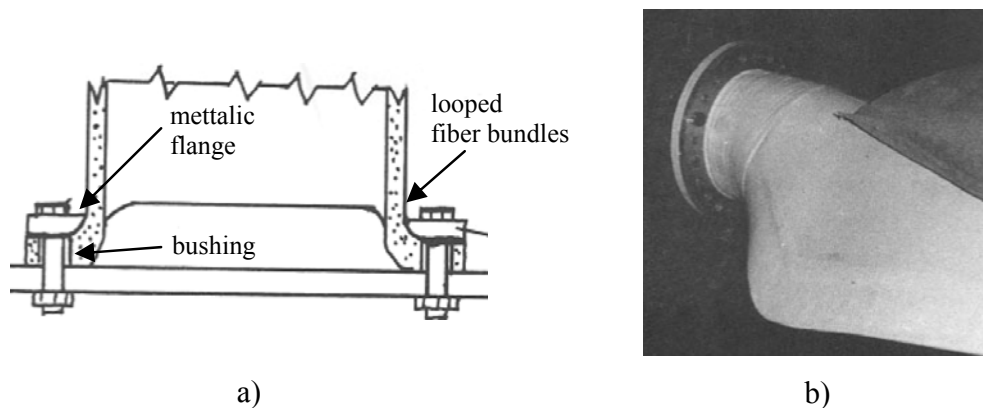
Hütter root concept used on Økær 4.5m blades [33]. a) sketch showing bushing and metallic flange, b) blade root showing metallic flange.
